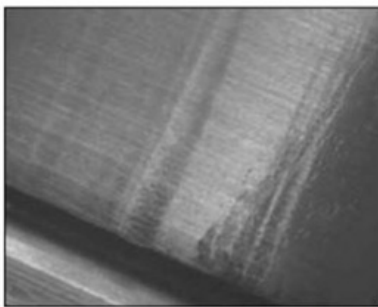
This inner ring of a spherical roller bearing shows roller impact damage from shock loading.
